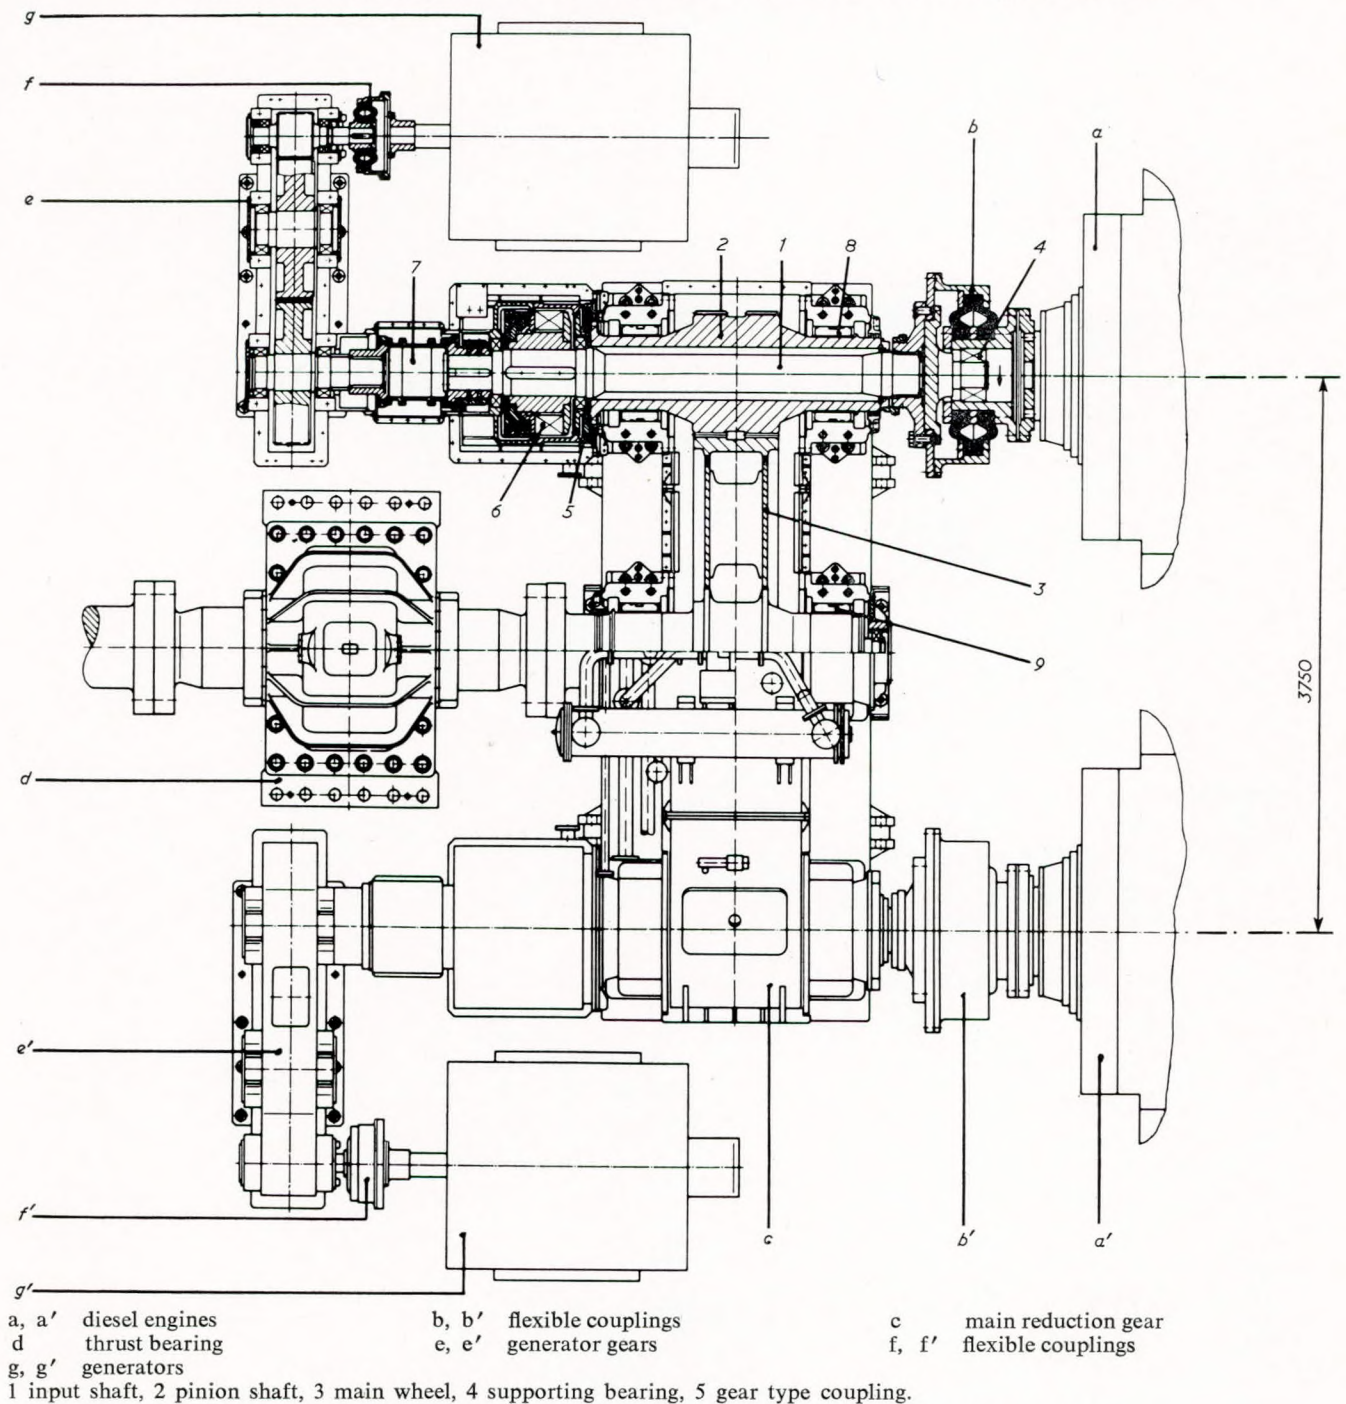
17.2 MW (23 400 hp) marine reduction gear installed with other machinery
